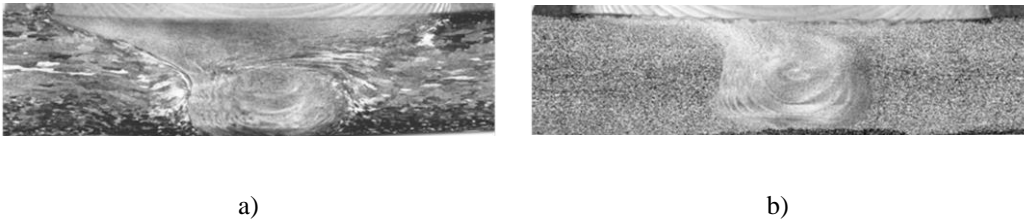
Cross-sections of the AA6082 (a) and AA5083 (b) welds.
